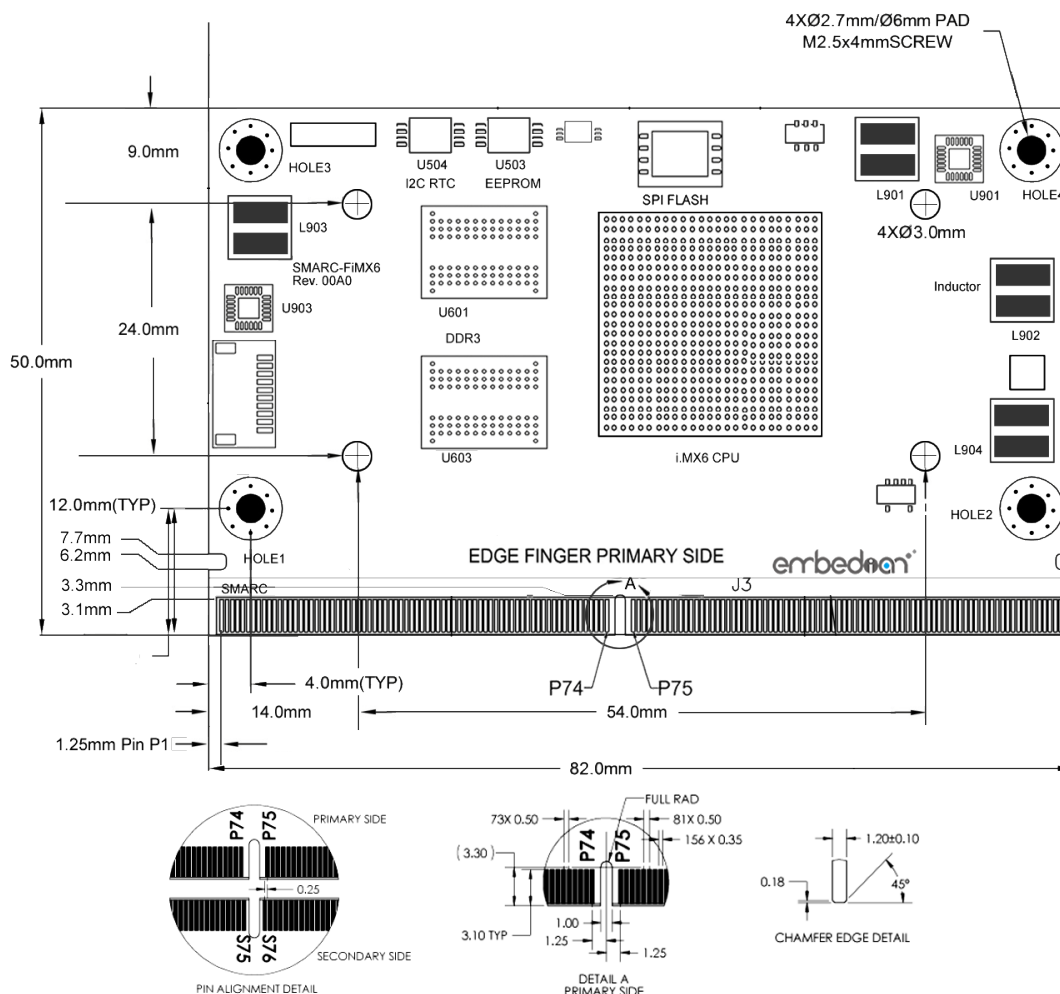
SMARC-FiMX6* Mechanical Drawings (Top View)
